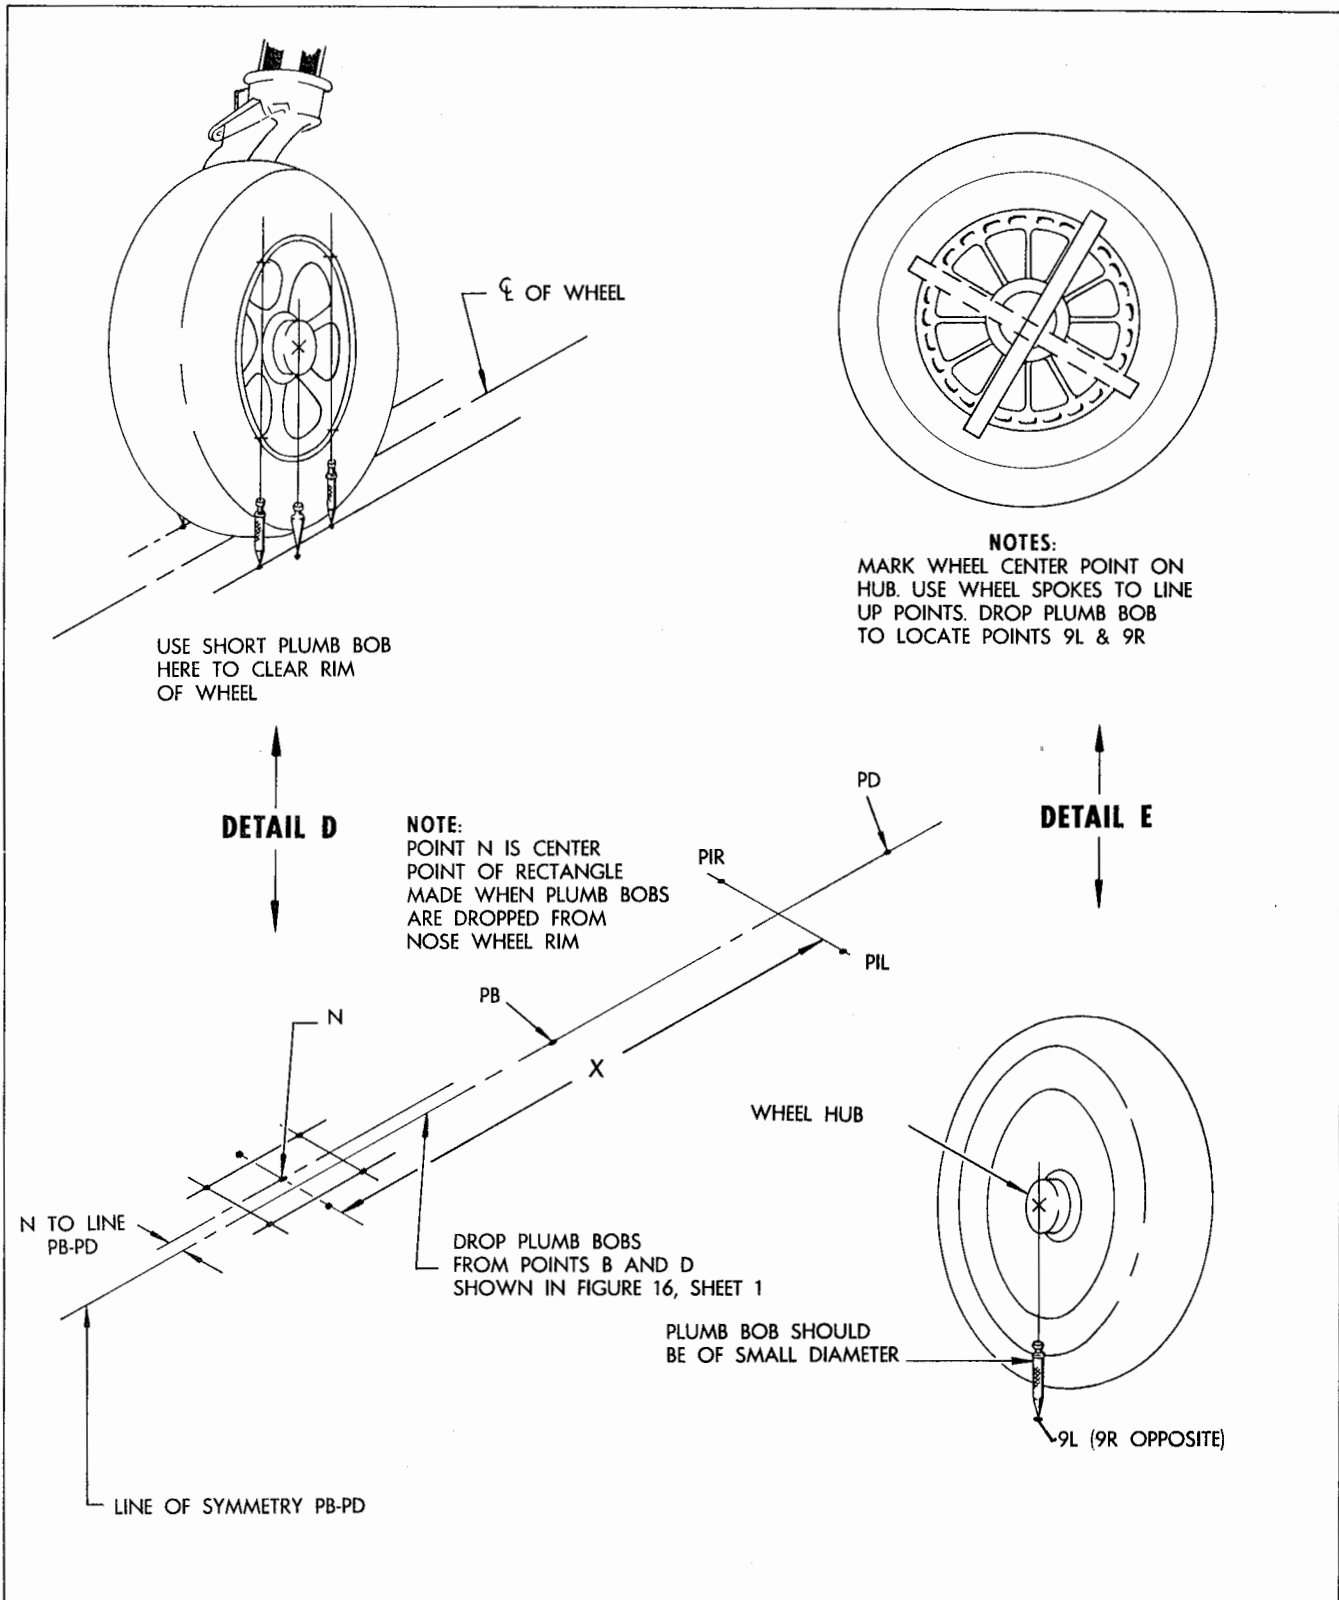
(Sheet 2 of 2 Sheets) — Alighting Gear Alignment
